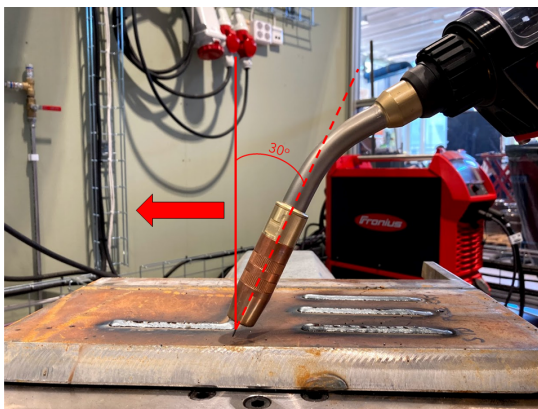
The recommended direction of welding and angle of the welding gun for MIG welding processes.
